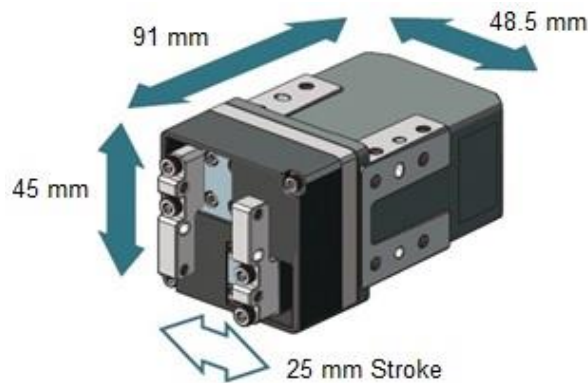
Compact dimensions with 25 mm stroke (12.5 mm per side).
